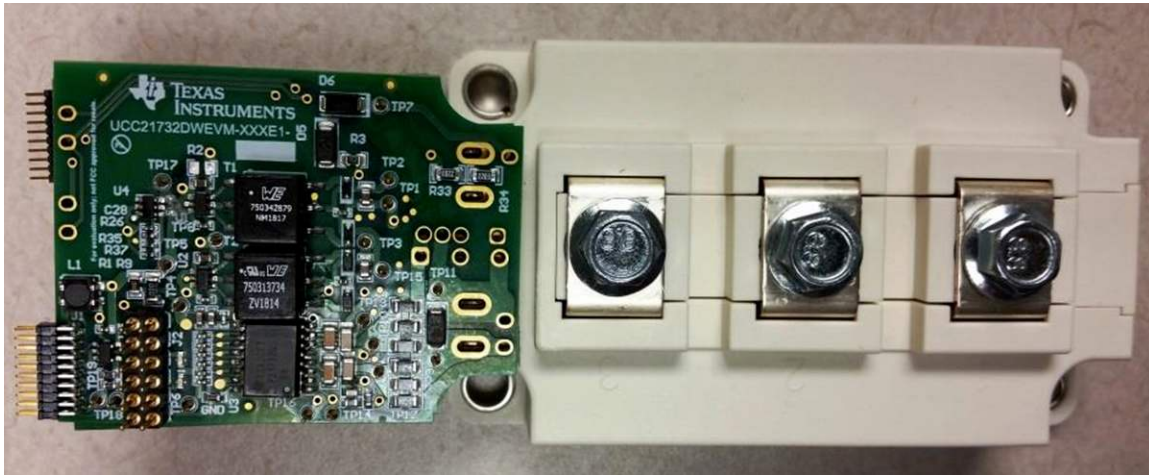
UCC21732QDWEVM-025 Bottom Assembly View
